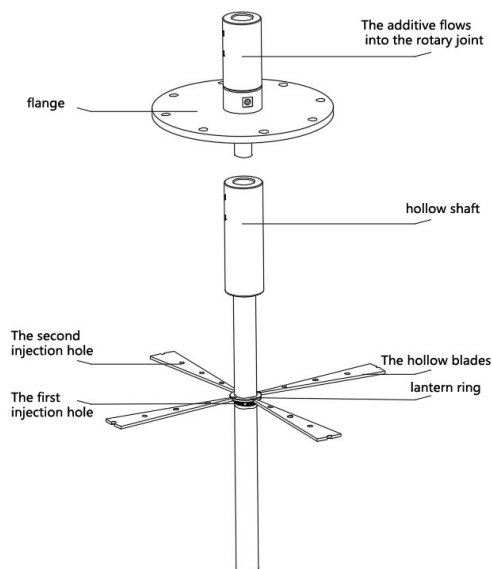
Schematic diagram of the partial enlarged three-dimensional structure of the cooking slurry assembly.
